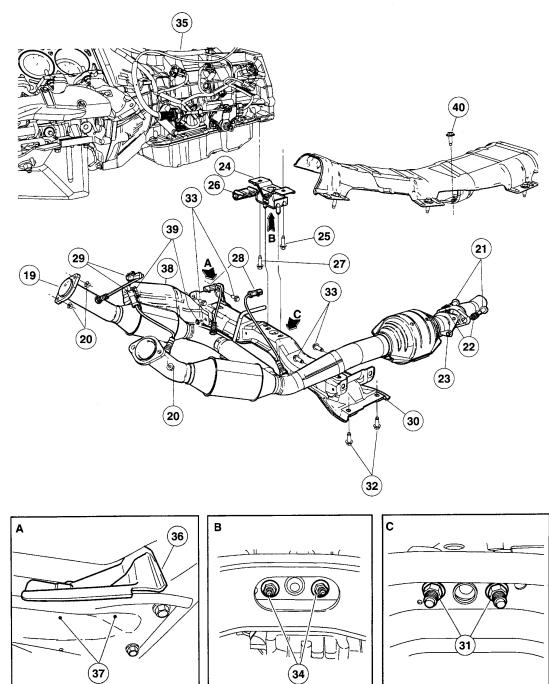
Removing/Installing Catalytic Converter Assembly Courtesy of FORD MOTOR CO.
